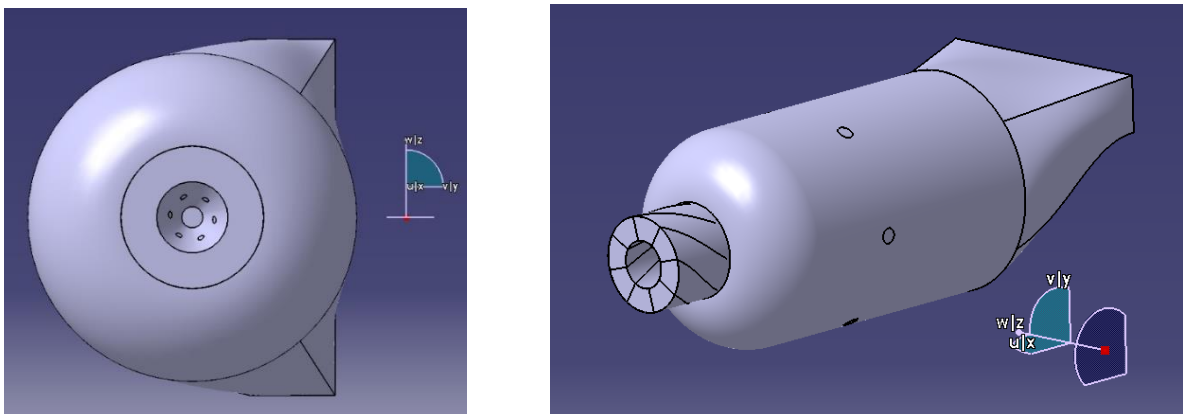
Geometry Front view (left) and Isometric view (right)
